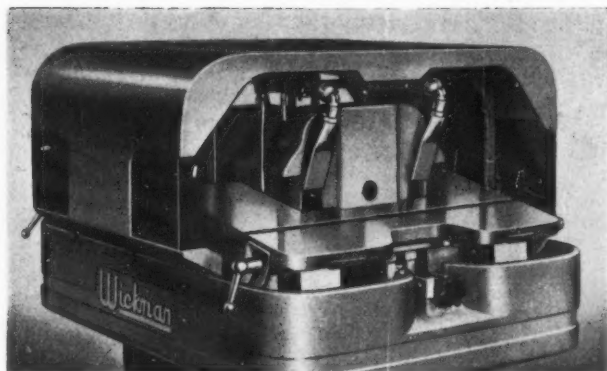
A Typical Off-hand Grinding Machine for Carbide Tools
